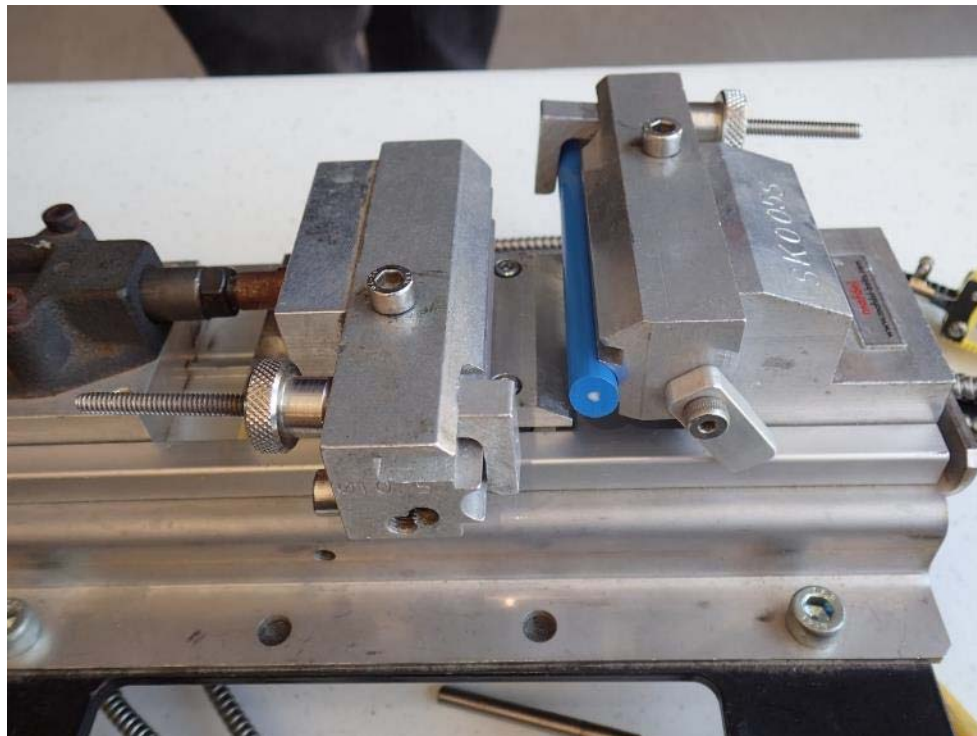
Additional views of components in the welding kit presented by Invenergy.
